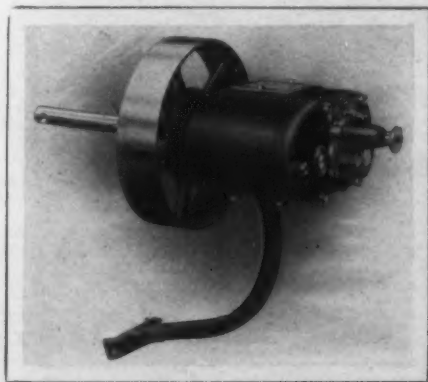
The Three-Speed Attachment Supplied for the Machine
